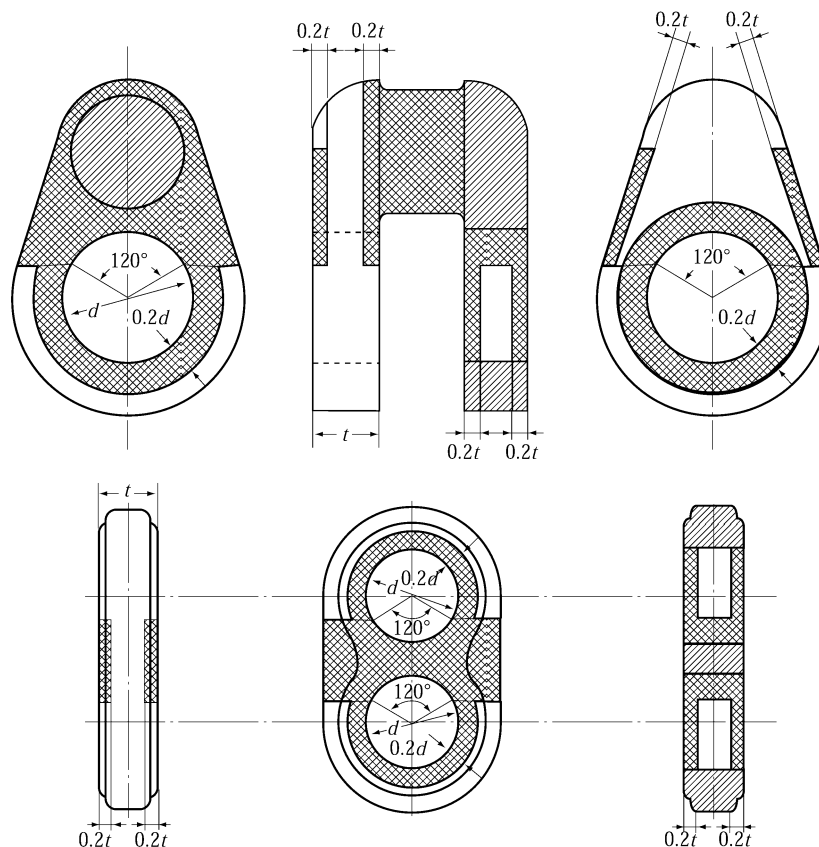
Zones where Repairs of Welding should not be carried out (Cross hatching zone)
